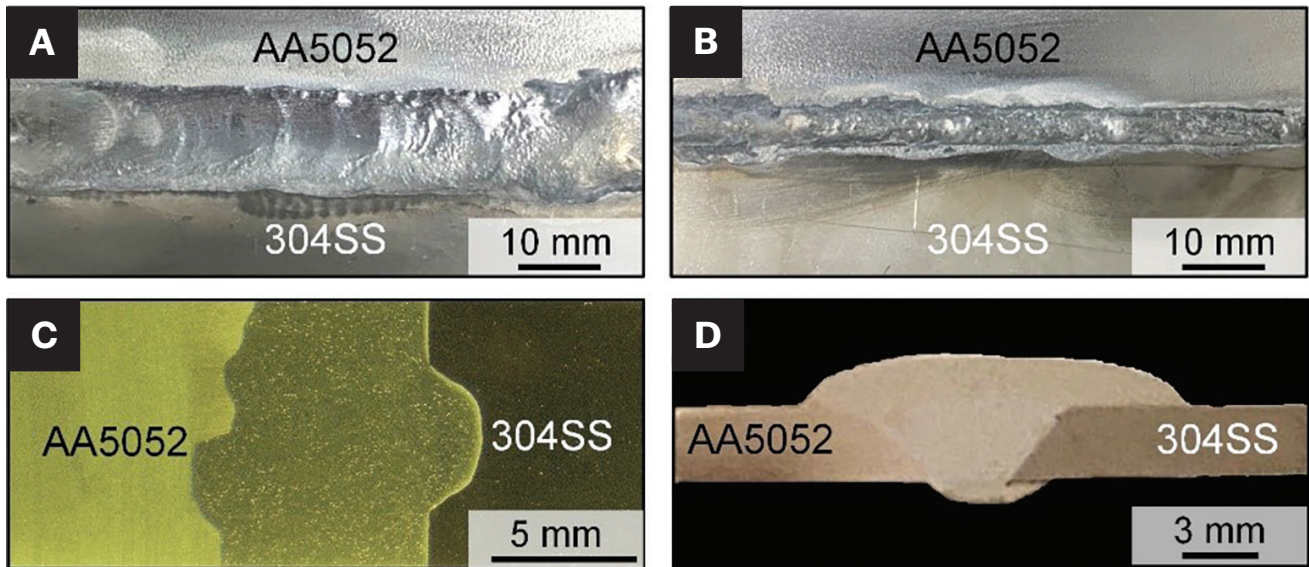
Weld appearance and sections of flared groove joints with: A — Front surface; B — rear surface; C — longitudinal section near the middle of thickness; D — cross section.
